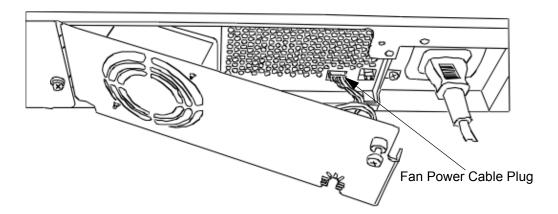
Opening Chassis Access Panel (CHS1U-US Chassis)
